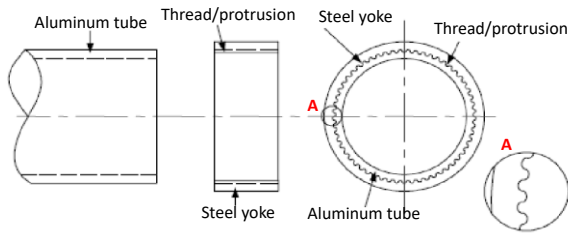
Torque transmission by machining threads/protrusions into specimens[28]
